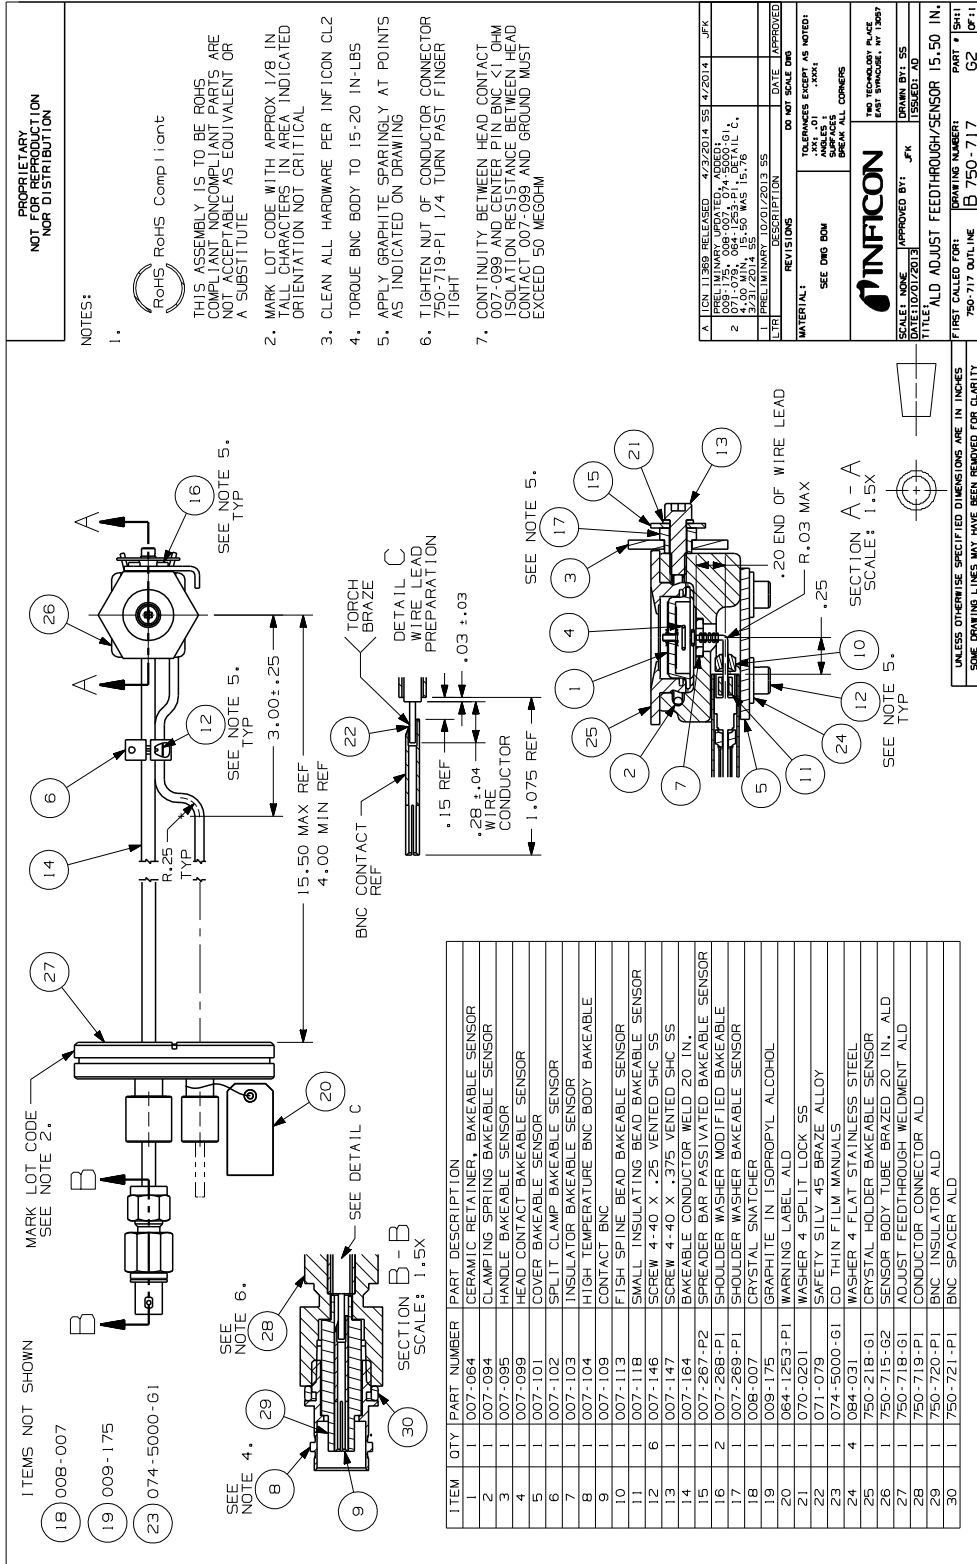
Adjustable ALD Sensor (PN 750-717-G2) assembly drawing
